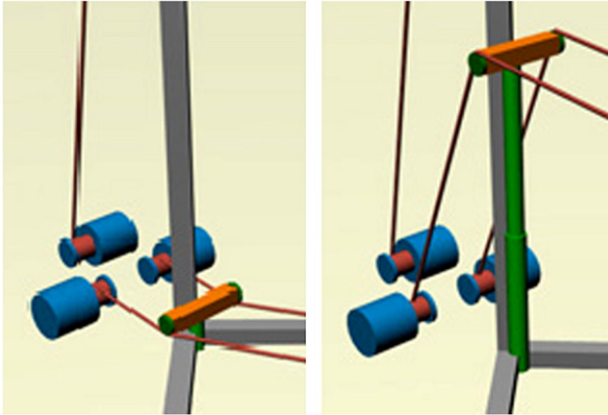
Crossbar in lowered (left) and raised (right) configurations.
